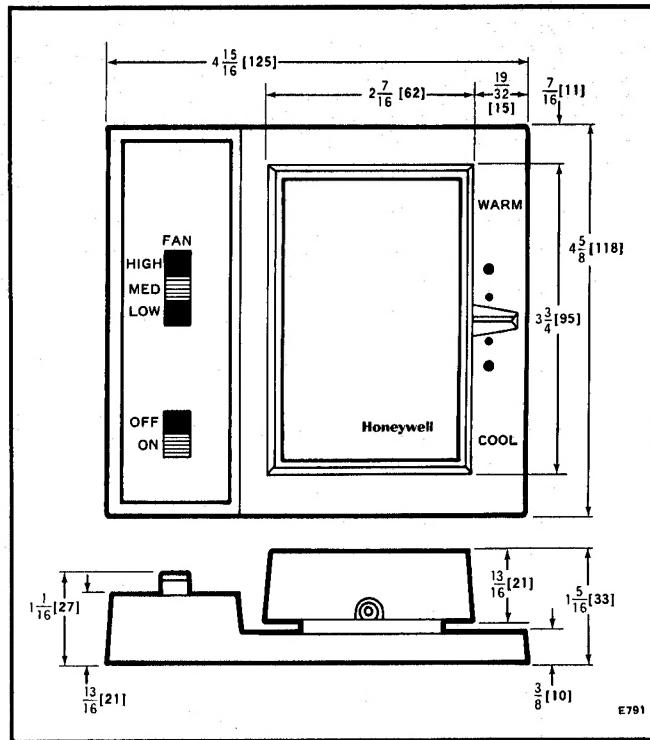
MOUNTING DIMENSIONS IN in. [mm IN BRACKETS] OF T4039 MODELS WITH MANUAL SWITCHING.
